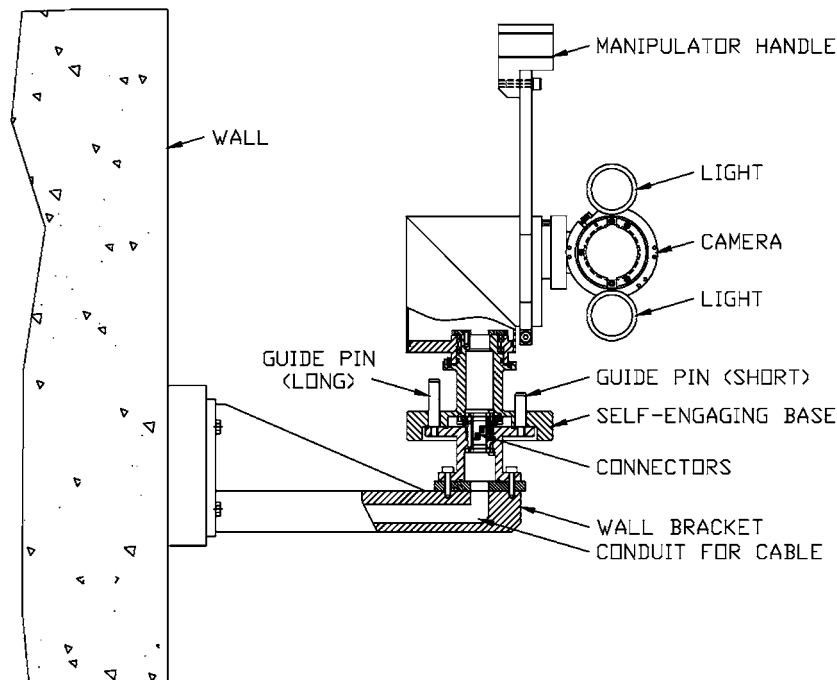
Typical Wall Mounted Remote Camera Installation (Elevation View)
